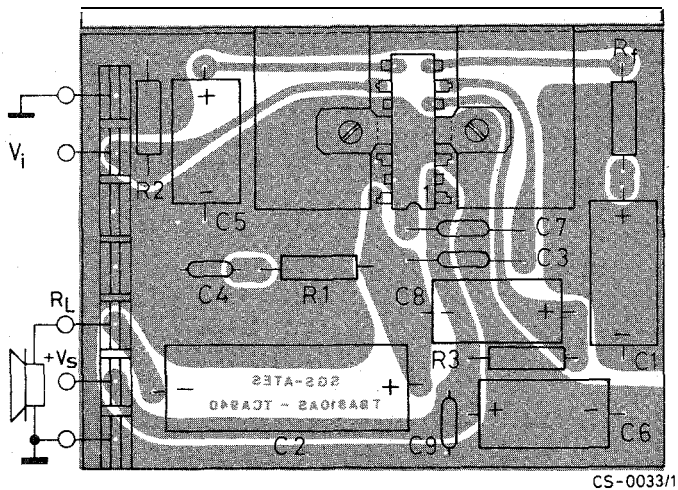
P.C. board and component layout for the fig. 11 circuit
